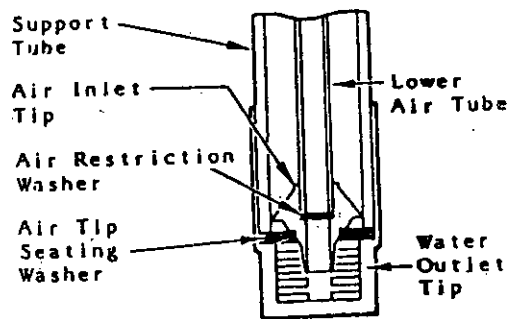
SUPPORT TUBE AND AIR TUBE FITTINGS
